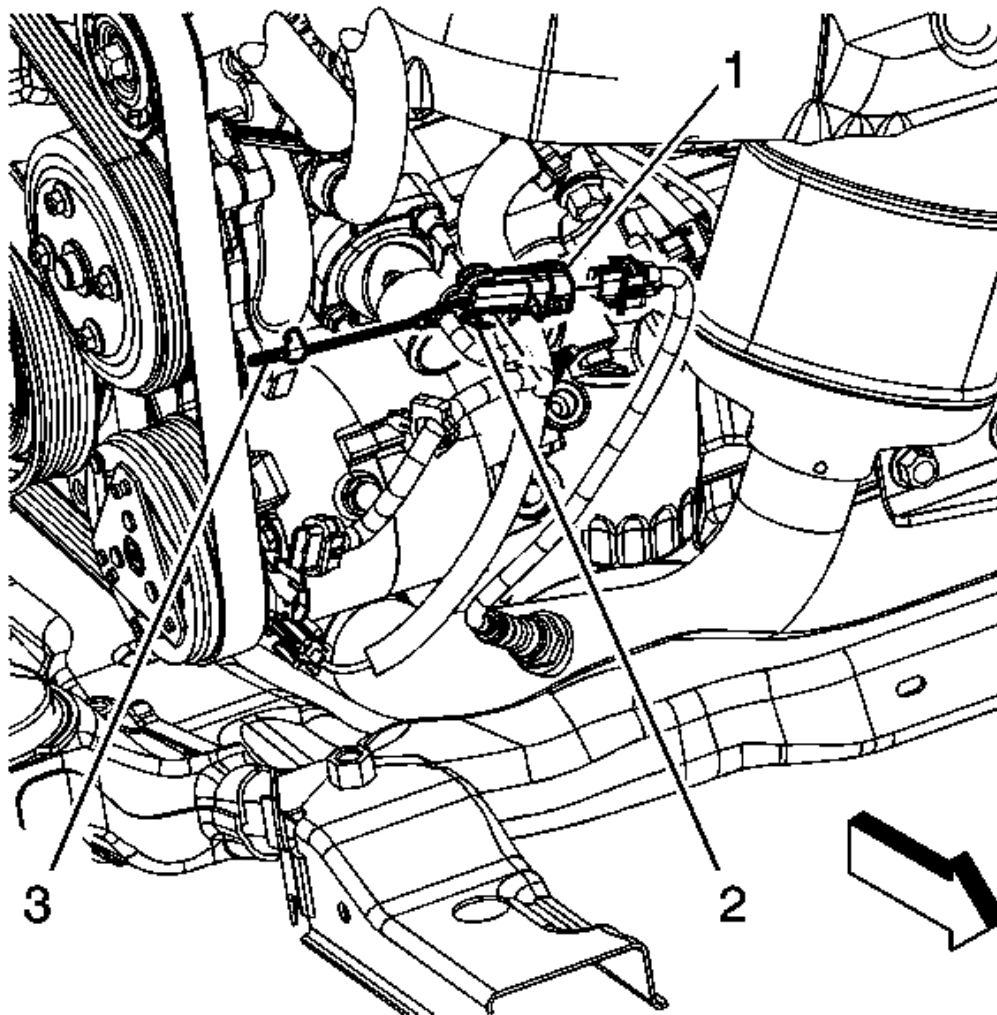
Identifying Connector Position Assurance (CPA) Retainer
